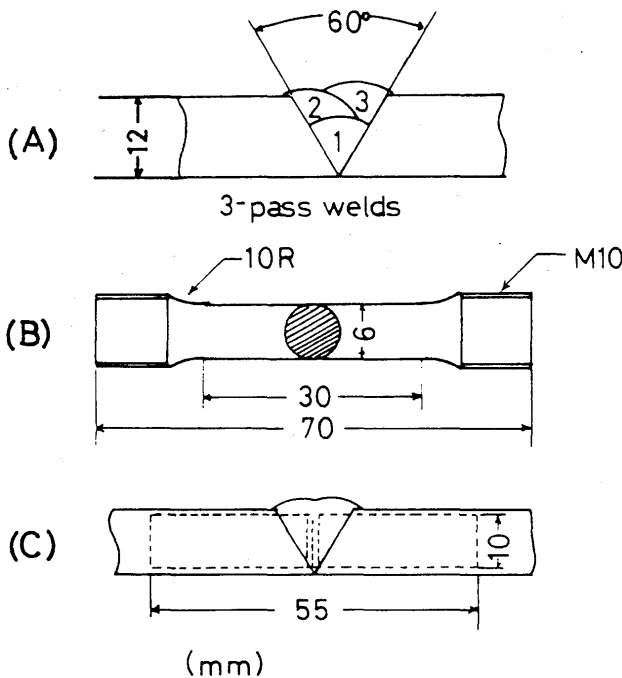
Location of test specimen, (A) Groove angle and profile of cross section, (B) Tensile test specimen, (C) Impact test specimen.
